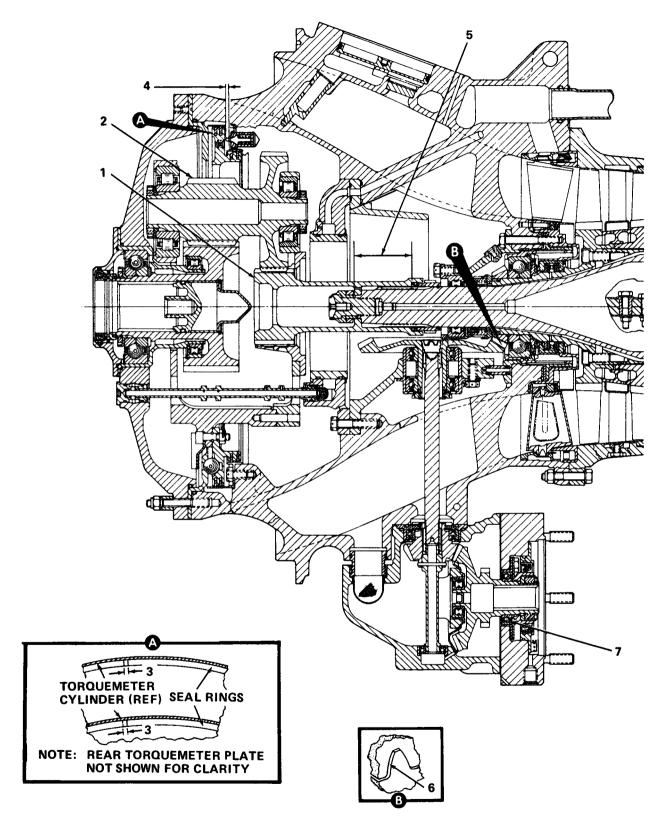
Fits, Clearances and Backlashes (T53-L-13B/703 Engines) (Sheet 1 of 4)
